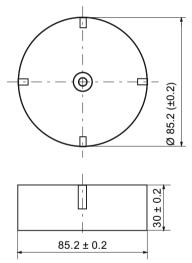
Dimension drawing of spacer 6GT2690-0AA00
